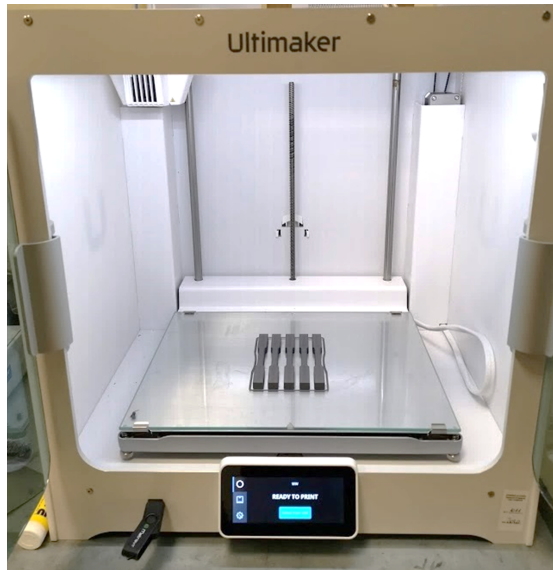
Tensile test samples printed on Ultimaker S5.
